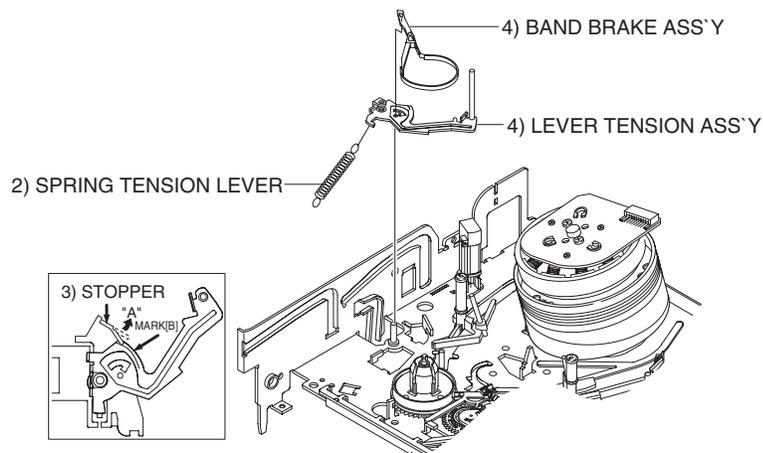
Lever Tension Ass'y, Band Brake Ass'y Removal
